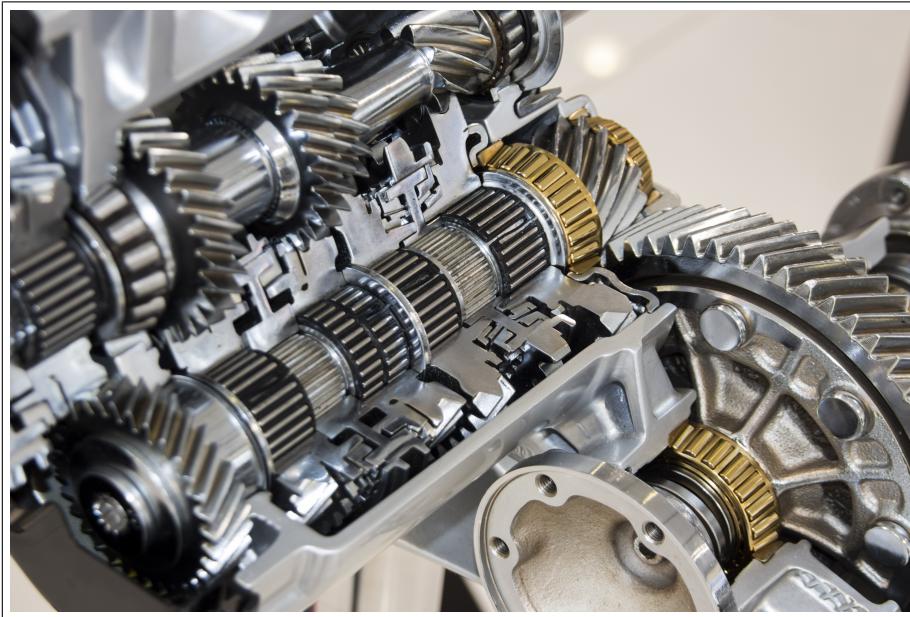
Transmission Gearbox (*computuneautorepairprovo.com*)
